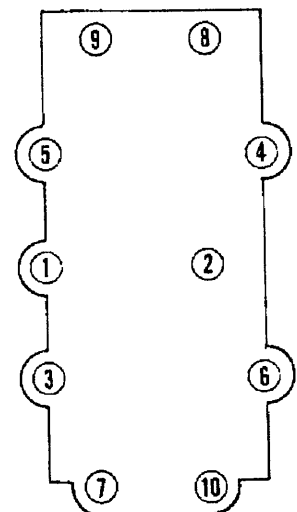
Crankcase cover screws should be tightened to 70-80 in.-lbs. (7.9-9 N·m) torque in increments of 20 in.-lbs. (2.3 N·m) using sequence shown.
